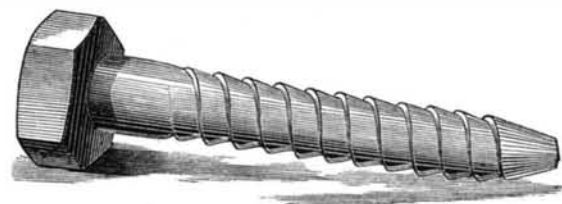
As forgings, the threads are beautifully clean, and for the general work of coach screws much stronger than the cut threads. A perspective view of the machine is given in Fig. 1, and a vertical section of it is shown in Fig. 2. In the latter figure, *a b* are the screw dies. The rod or bolt to be threaded is placed upon the lower die, *b*, and fed forward whilst screwing it. The upper die is mounted on a slide, *c*, which is actuated in the downward direction by an eccentric, *e*, on the main shaft and the toggle bar, *d*, the upward motion being obtained by an internal spiral spring, *f*. The lower die, *b*, is carried in a slide, *g*, and is adjusted at the
